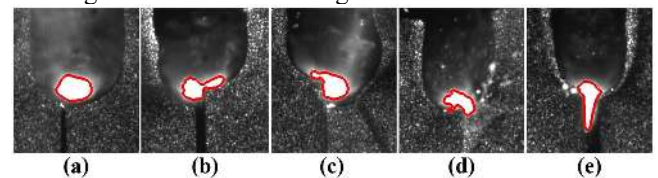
(a)Sound well weld; (b), (c)Dislocation; (d)Inclusion; (e)Large gap.
